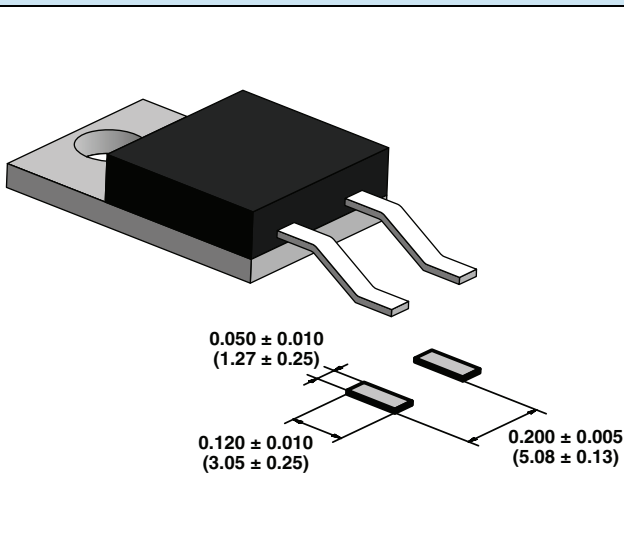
VPR221S LAND PATTERN DIMENSIONS in inches (millimeters)
